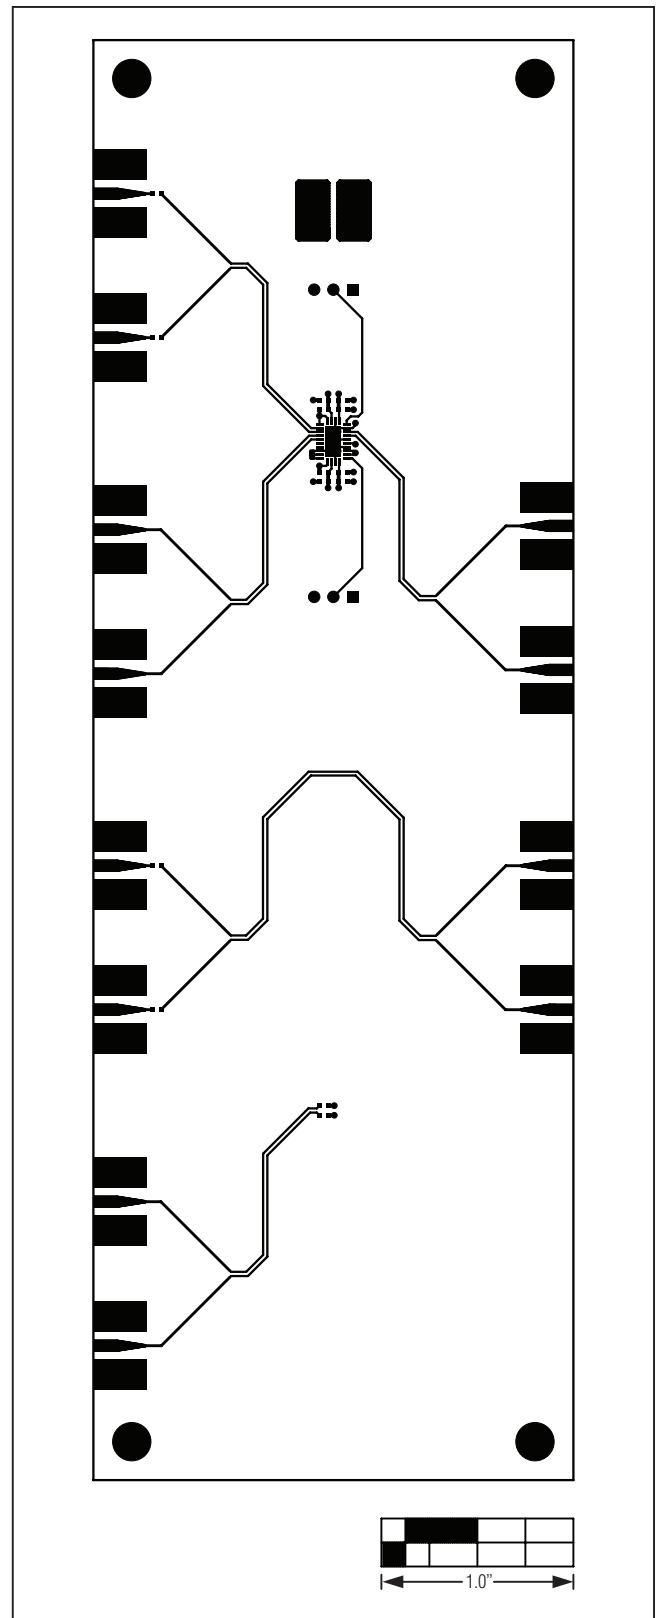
MAX4888B EV Kit PCB Layout—Component Side
